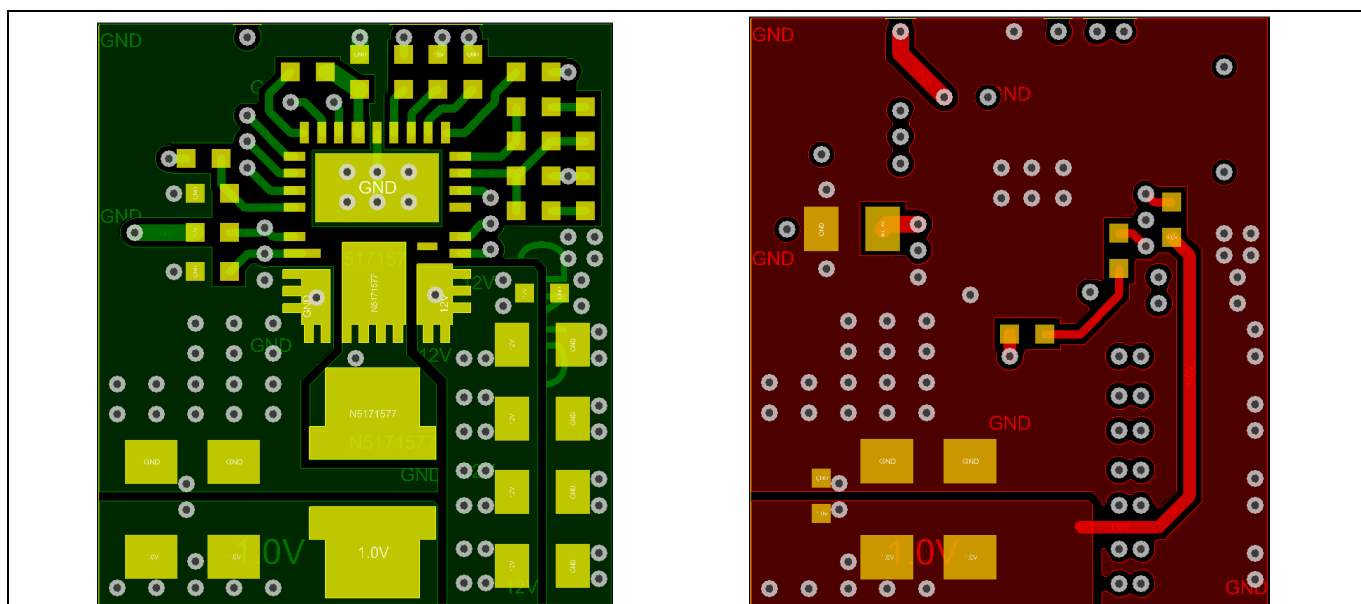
Top layer of the IR38060 macro layout (15 mm x 17 mm): Top (left) and Bottom (right)
